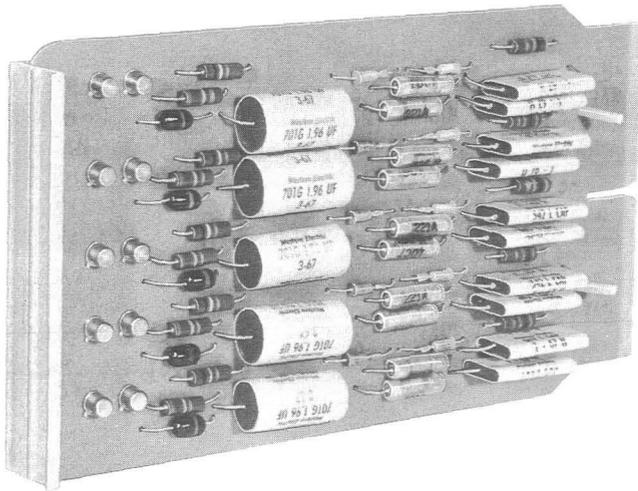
Ringing Detector Circuit Pack Equipped With Five Ringing Circuits—Front View
